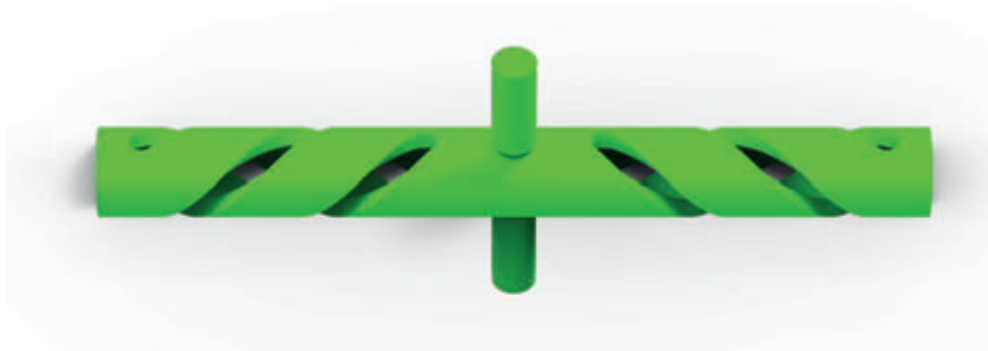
Detail of Helical Tube with Control Rods. The angle of the helical paths was set to 45° with the number of revolutions equal to one to allow for one complete rotation of the inner and outer cutting blade during a cycle.
